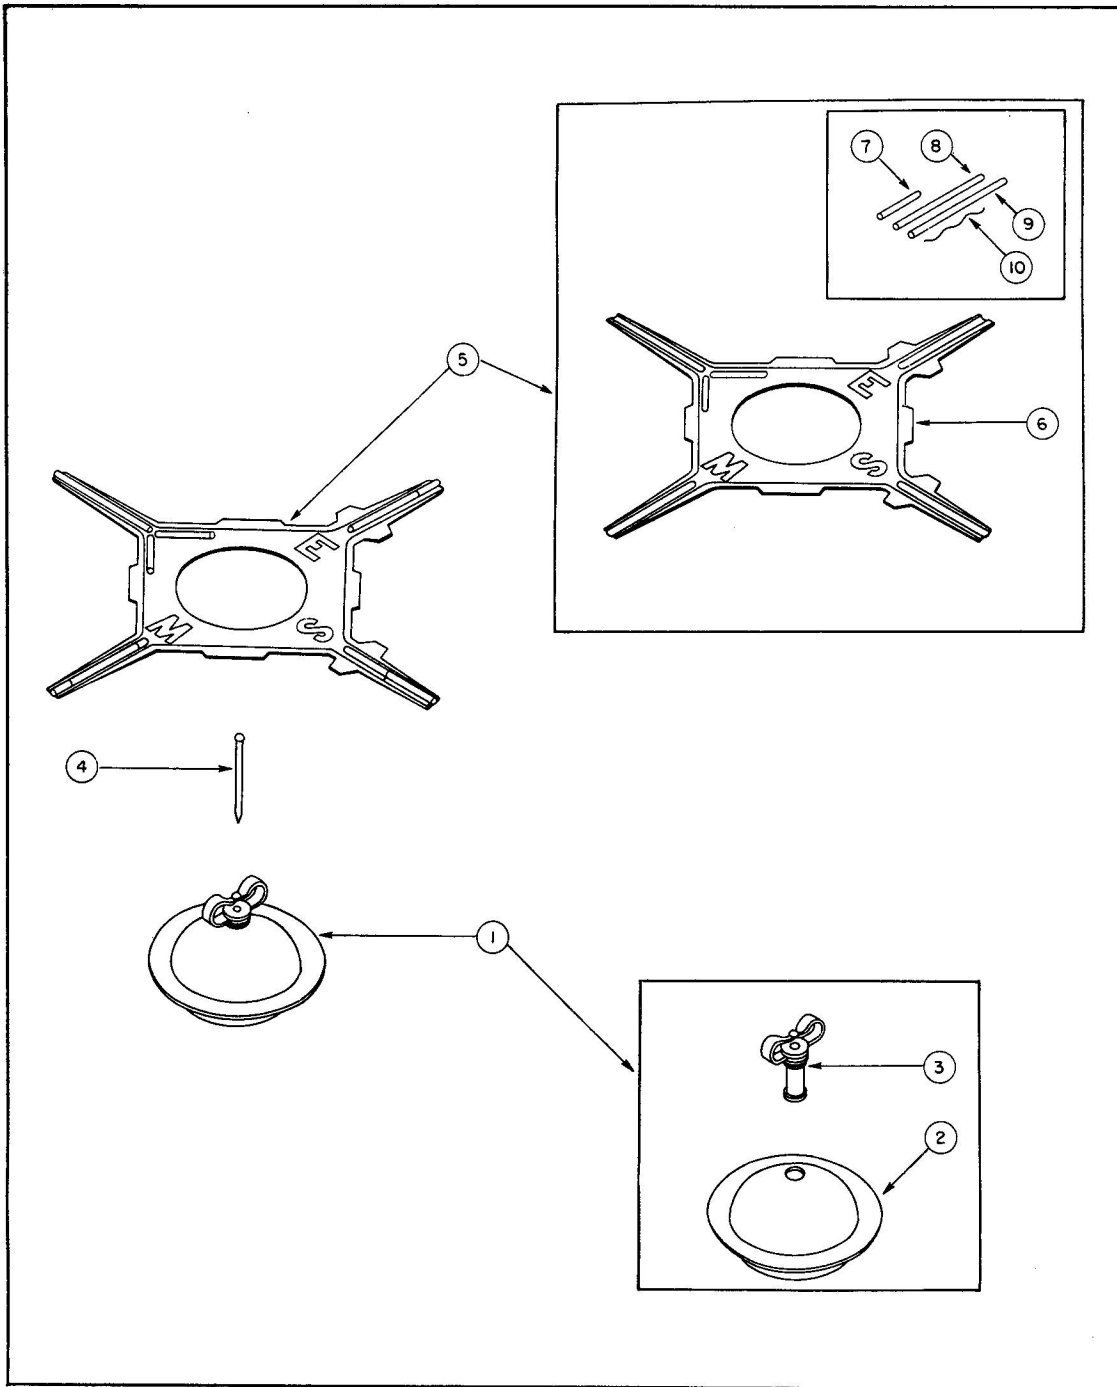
Exploded View - Compass - Card, Float, And Pivot Assembly - Type D-12
